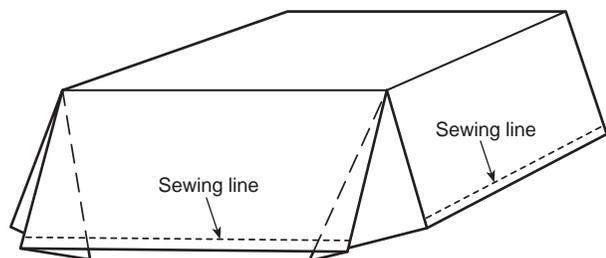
Folding of fabric for loose filling materials.
